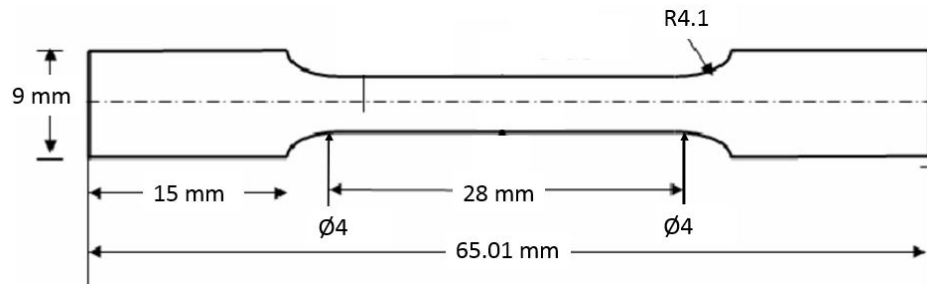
The dimensions of tension rod after rough machining given in millimeters.
